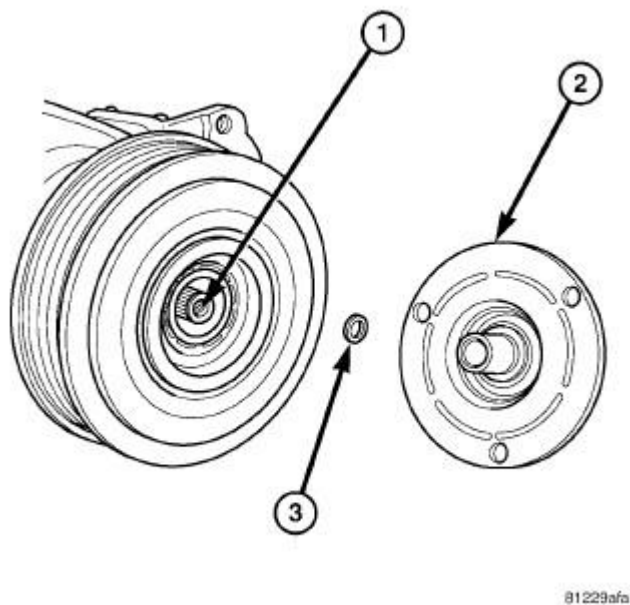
Identifying Compressor Shaft, Clutch Plate & Shim
